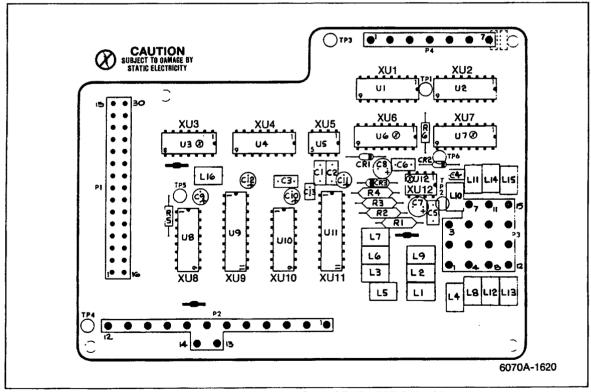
A3A8 Synthesizer Control Buffer PCB Assembly
